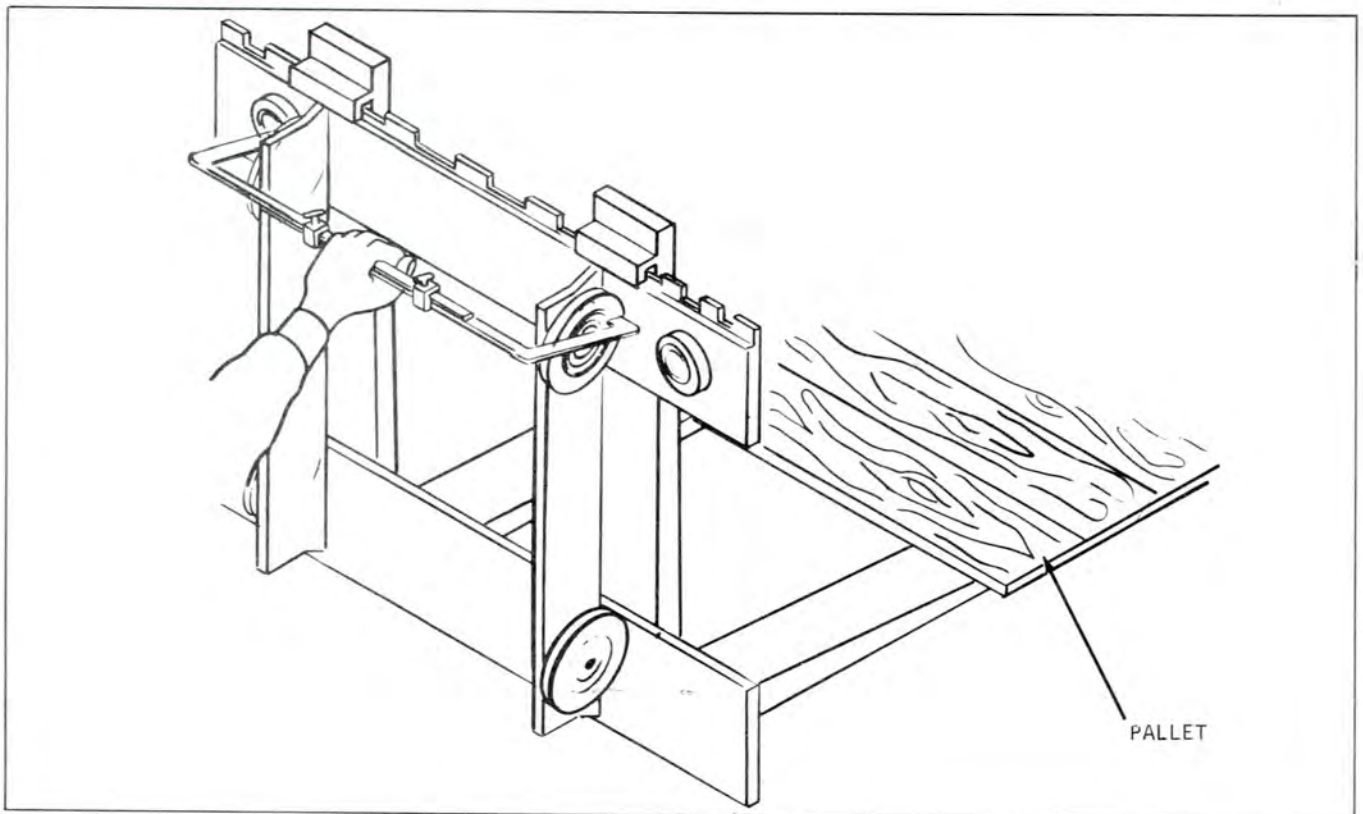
Spanning Upper Rollers (Four Roller Carriage)
